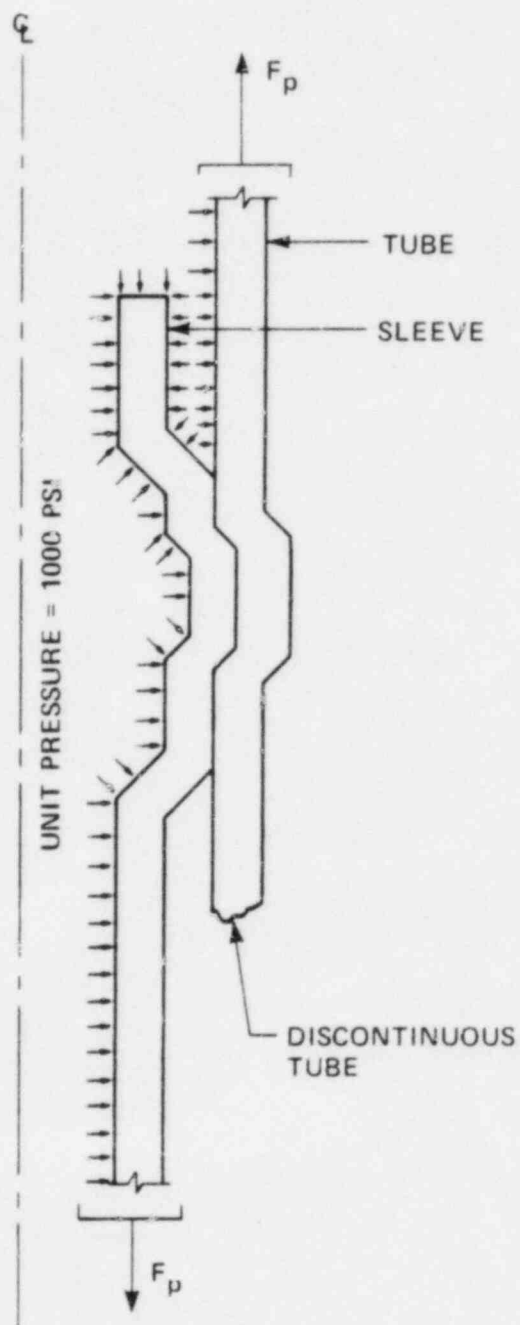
Boundary Conditions for Hybrid Expansion Joint, Unit Primary Pressure, Tube Discontinuous
